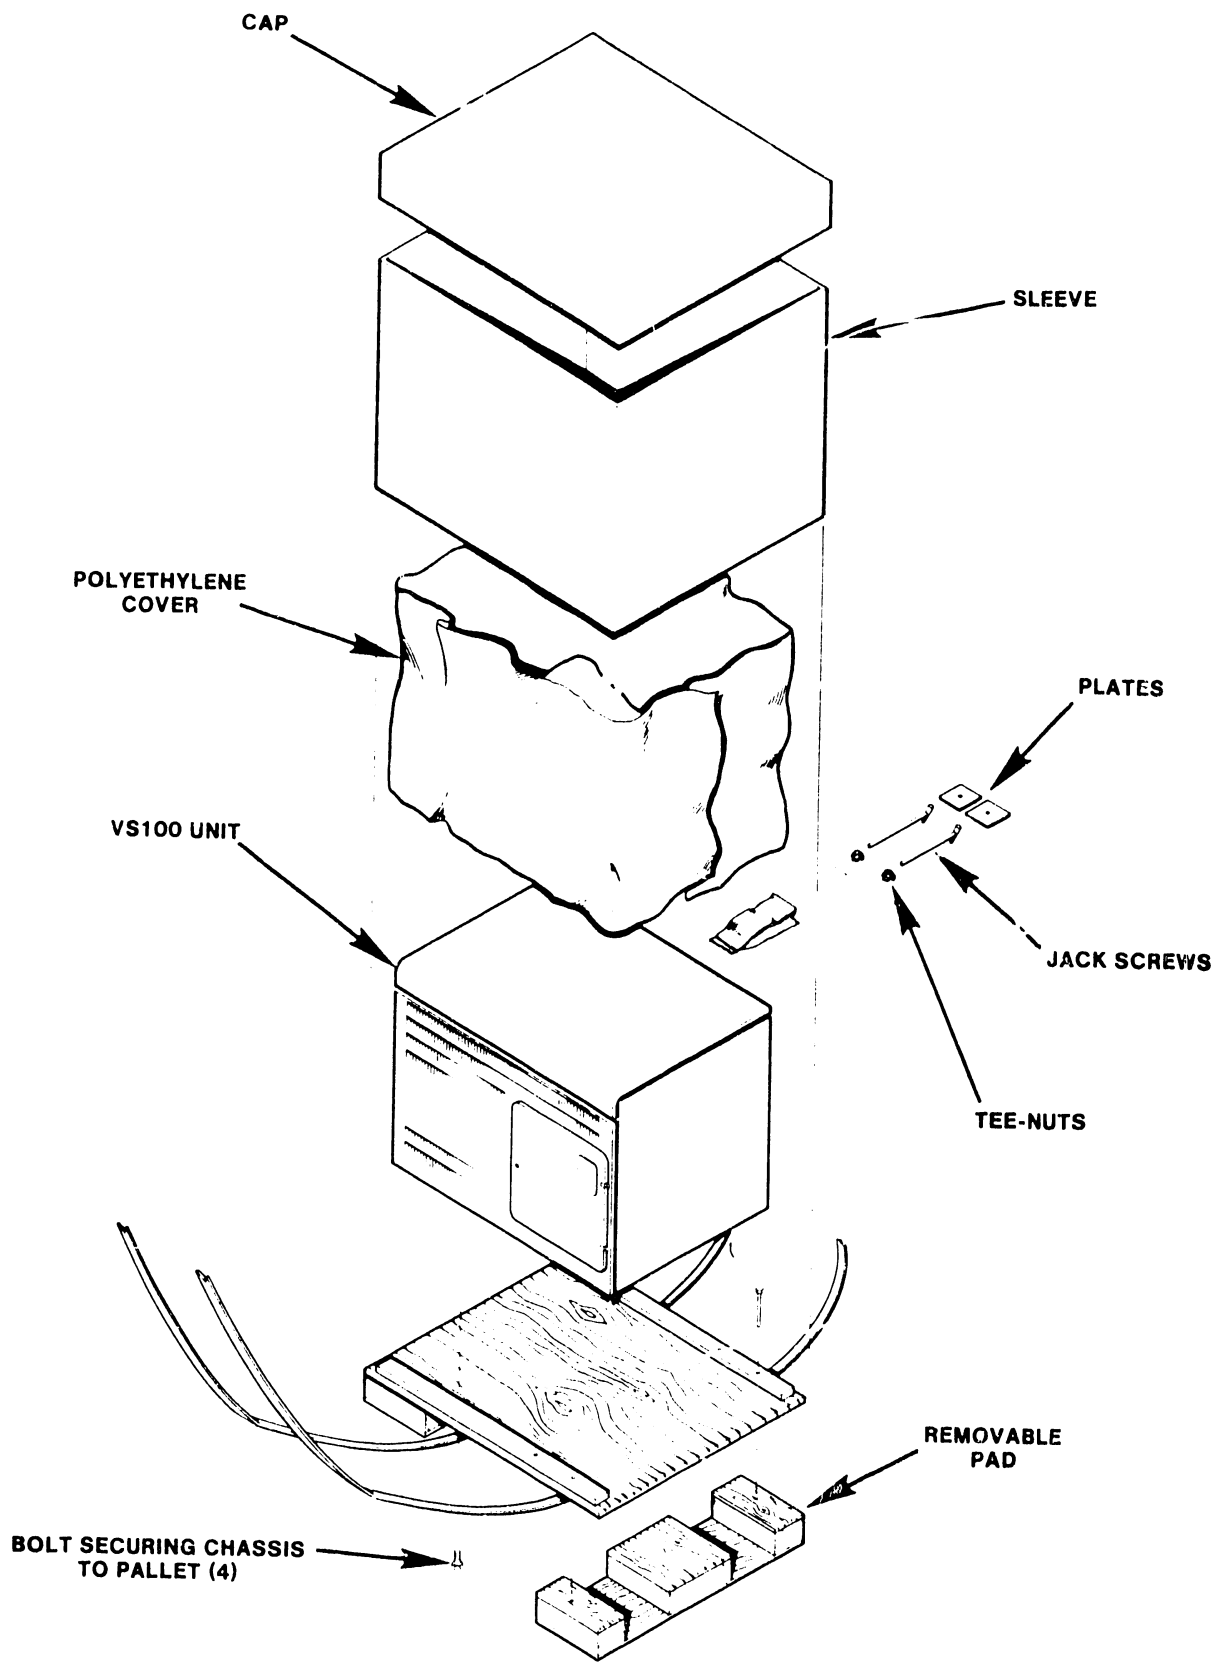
EXPLODED VIEW OF PACKAGED VS-100 MAINFRAME
